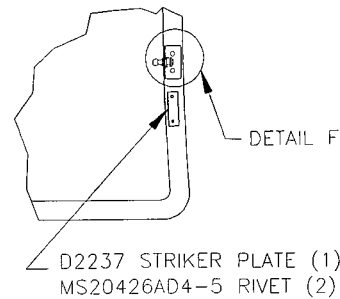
TYPICAL DOOR FRAME (AFT EDGE)
